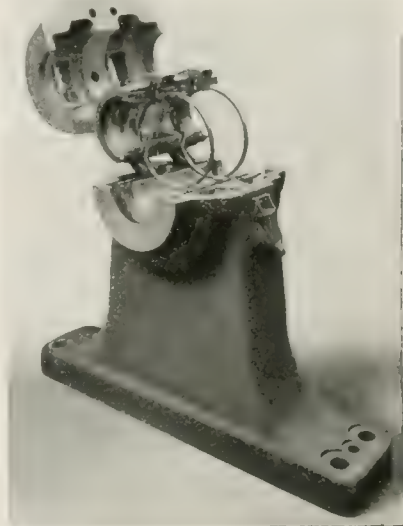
A MODERN TYPE OF PILLOW BLOCK SHOWING BEARING AND OIL RINGS
